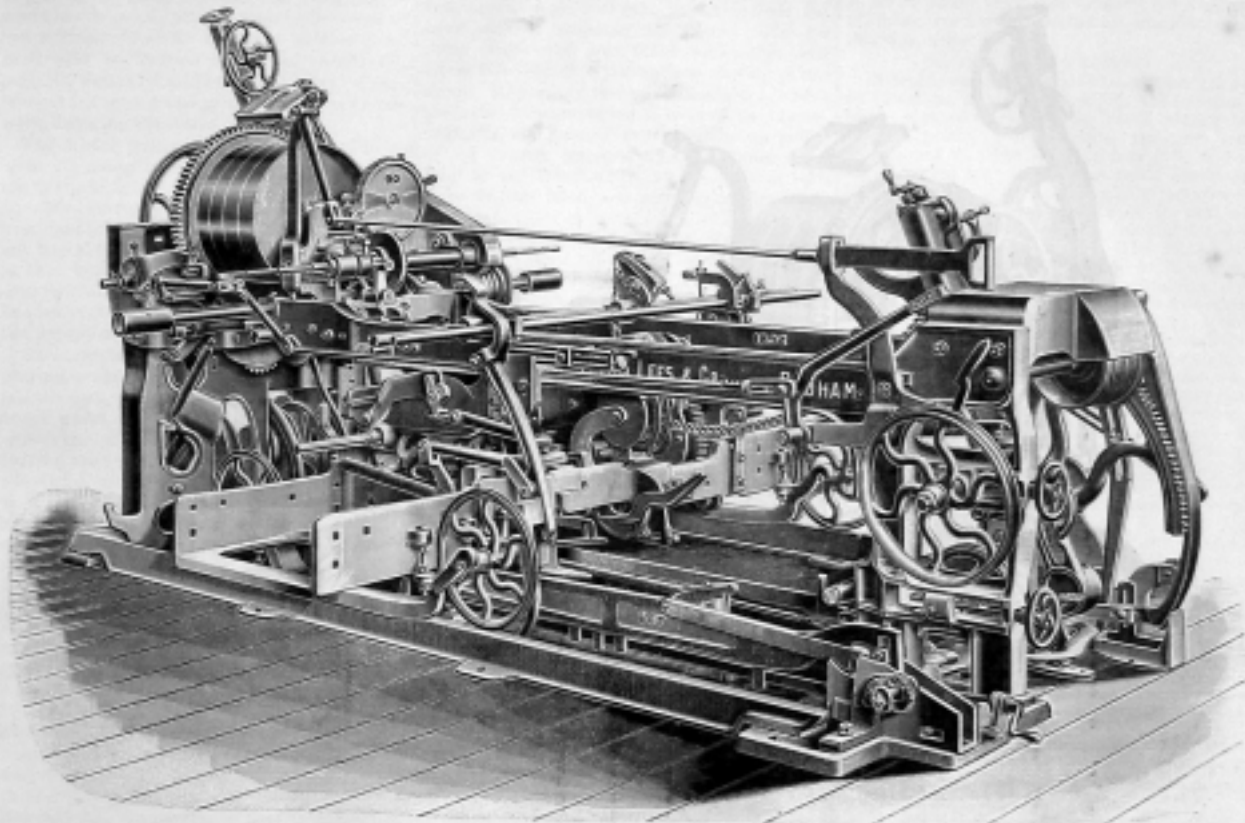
SECOND FRONT VIEW OF IMPROVED HEAD STOCK.—MESSRS. ASA LEE & CO., LIMITED, OLDHAM.
